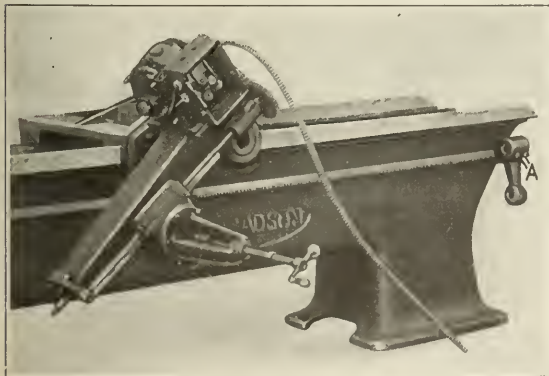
Radial Drilling Machine drilling Holes for Screws used to secure Feed Rack to Bed
